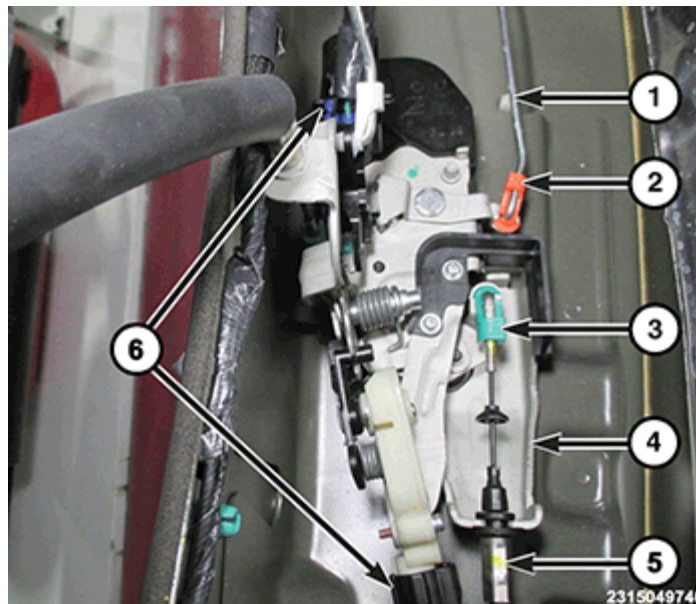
Door Lock Cylinder Link, Clips), Exterior Handle Release Cable & Wire Harness Connectors
